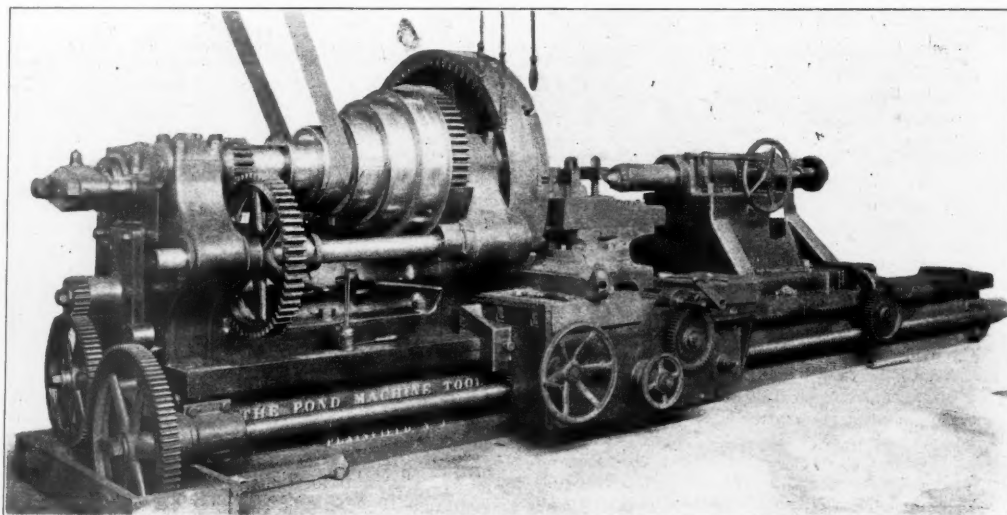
General View of 60-in. Engine Lathe, Belt Driven.
